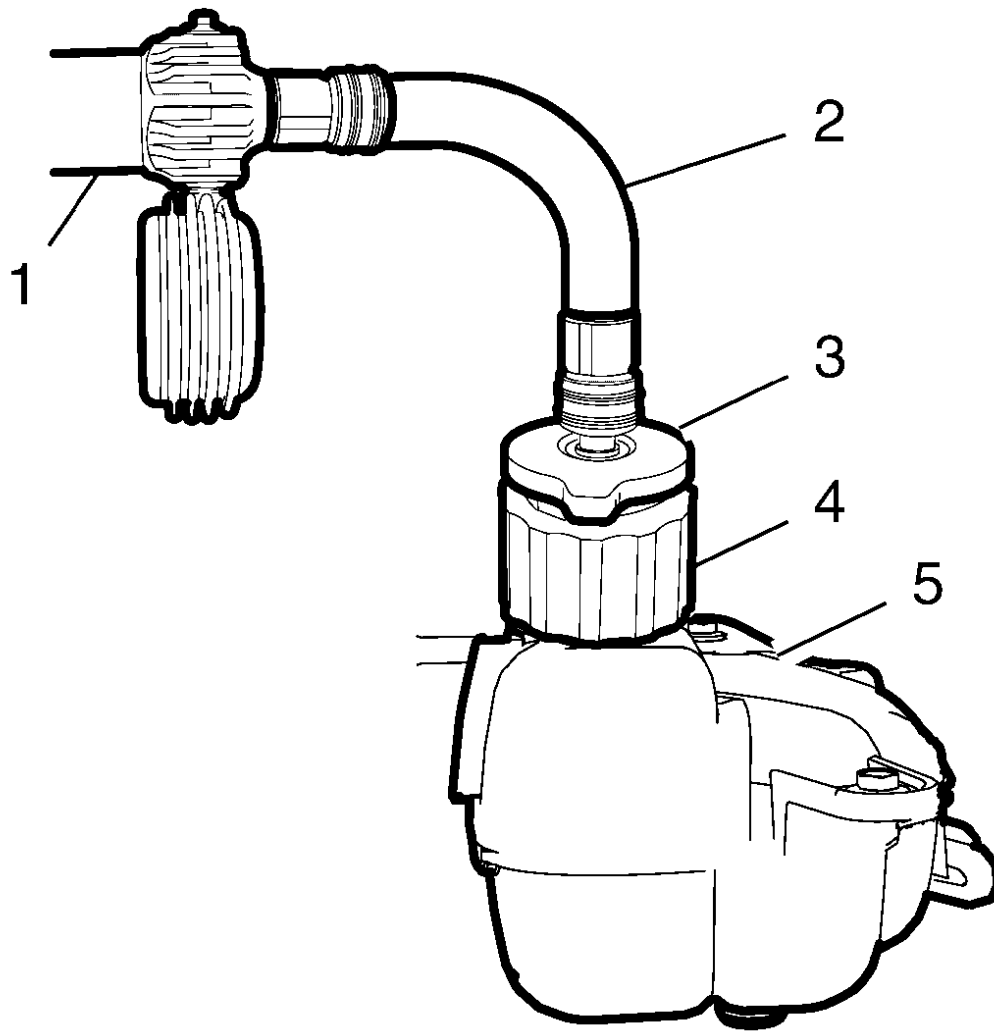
Commercial Cooling System Pressure Tester, Assembled Adapters and Coolant Recovery Reservoir
